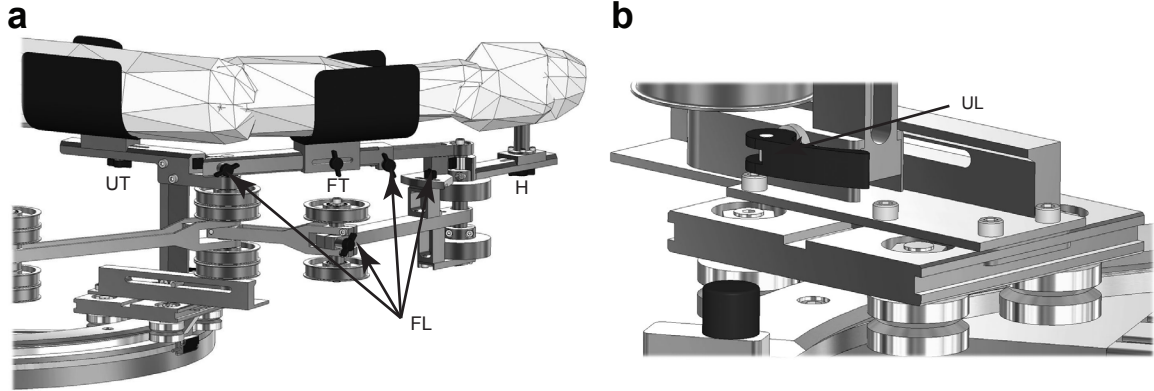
Close-up views of the adjustment system. (a) A side view of the exoskeleton showing all thumbscrews needed to adjust the exoskeleton for different size users. (b) A close-up view of the carriage (opposite side view of (a)), showing the quick-release clamp for the upper-arm length adjustment. The adjustment labels are as follows: UL - upper-arm length, FL - forearm length, UT - upper-arm trough, FT - forearm trough, H - handle.
